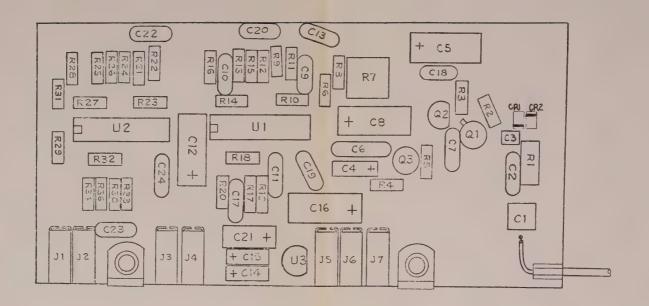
A1, 100 MHz AMP PC ASSEMBLY #05723801 Rev J
